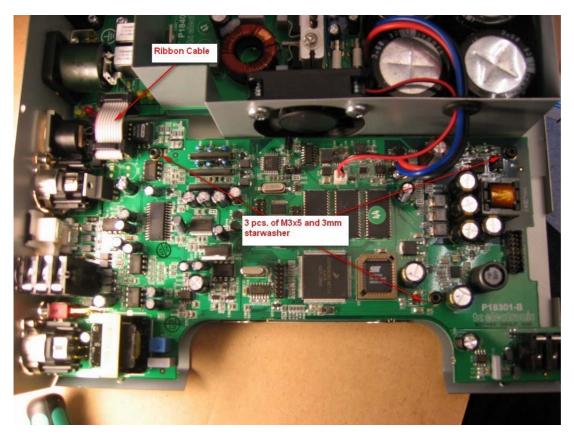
Secure the main board with 3mm screws and washers and mount the Ribbon cable.
